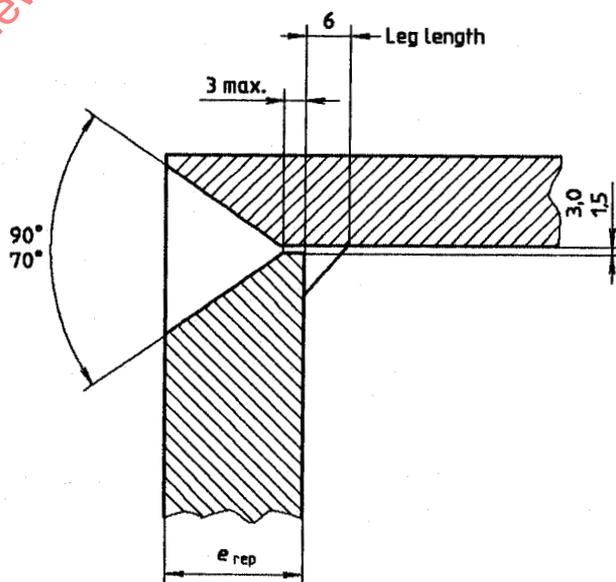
Attachment of end plates or tube plates to reversal chamber wrapper plates
